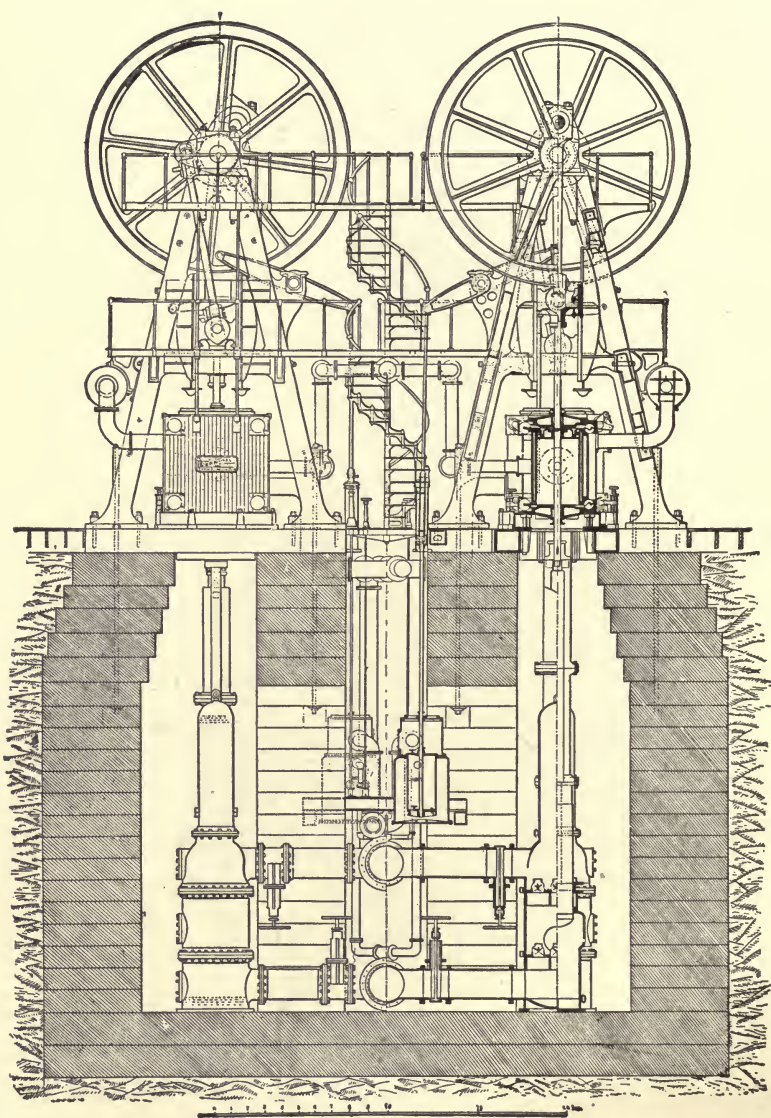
Reynolds Three Cylinder Compound Pumping Engine.
